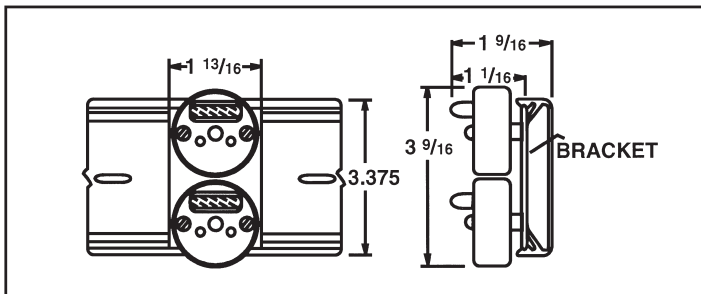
Installation with the Bracket and Track (Dimensions in inches)
